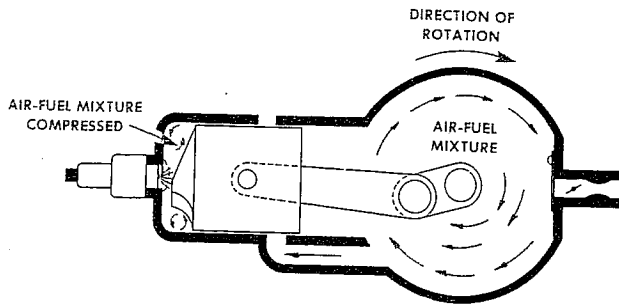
The piston squeezes the mixture in the combustion chamber. (Tecumseh Products Co.)
